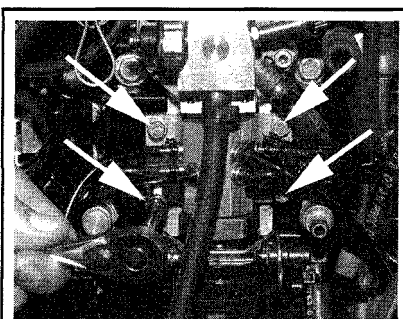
To remove the assembly itself, loosen the 4 distribution manifold bolts...
